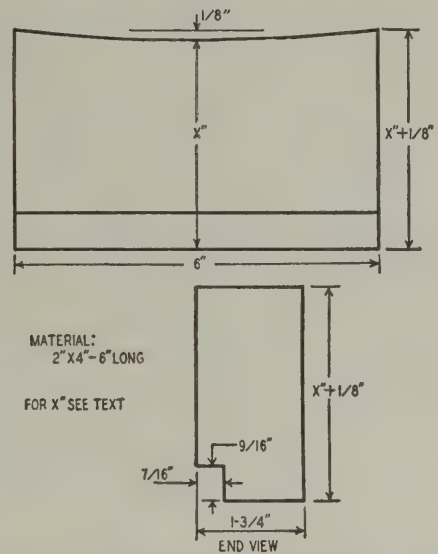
Details of the lower supporting block for the 20-inch glass picture tube.
